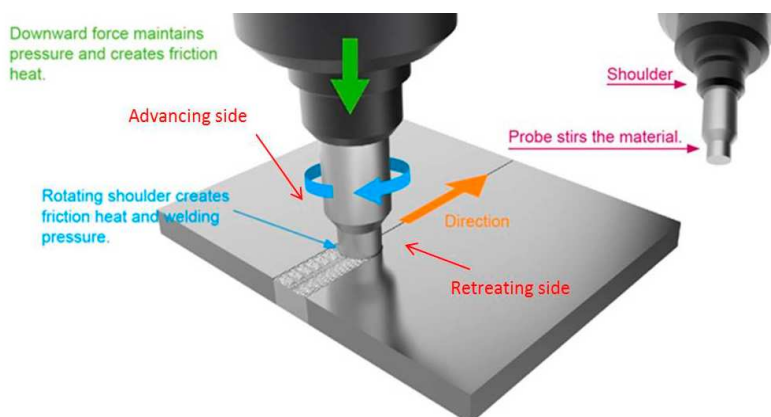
Schematic Diagram of Friction Stir Welding Process
